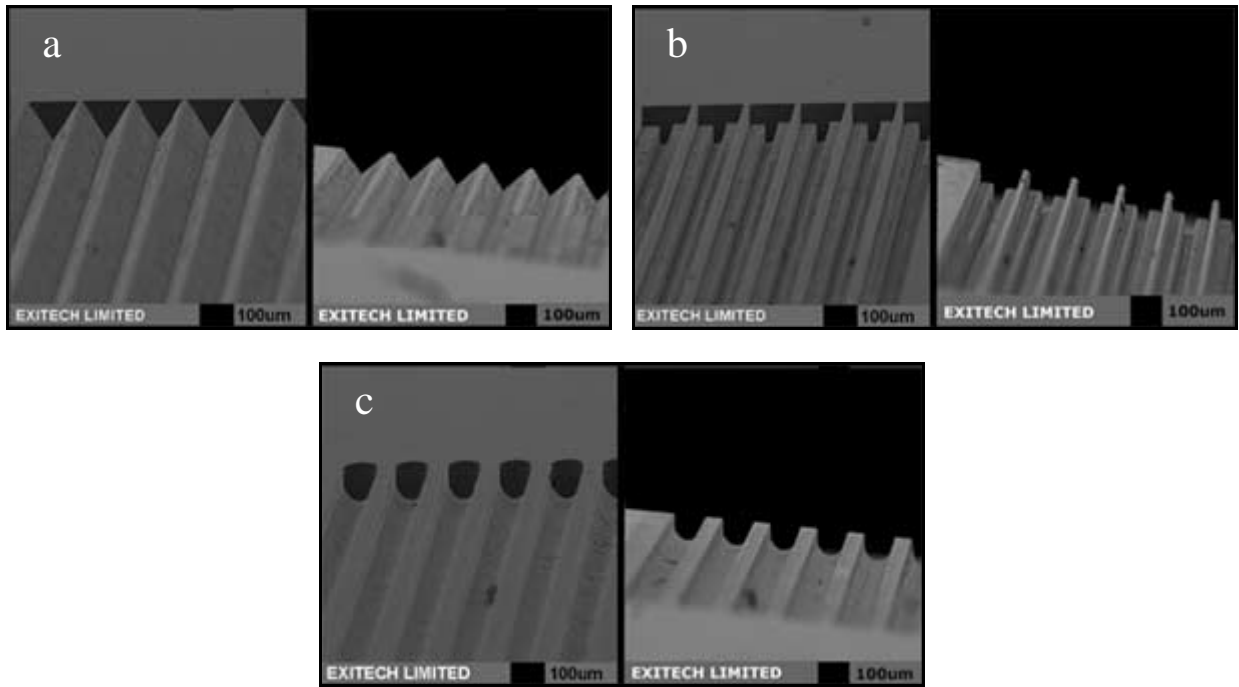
Shaped cross-section micro-channels produced using workpiece dragging technique.
